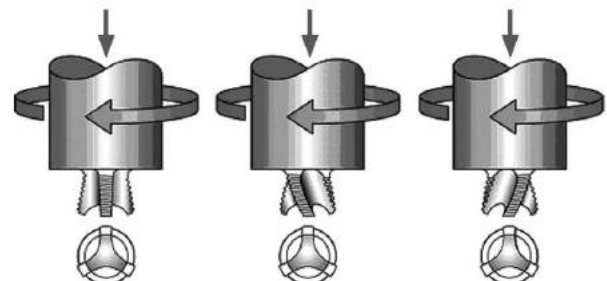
Flared-TrifluteTM tools developed by The Welding Institute (TWI), UK: (a) neutral flutes, (b) left flutes, and (c) right hand flutes
